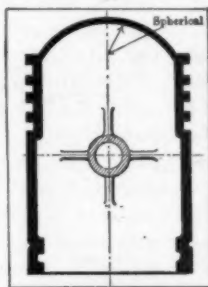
Section of a piston with a spherical head which is used in a few motors
